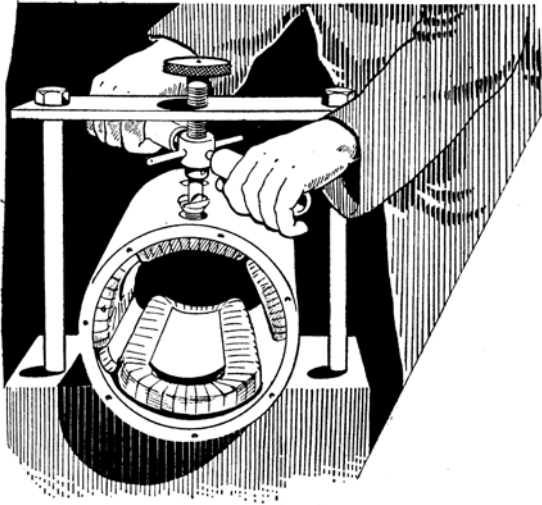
A Device for Unscrewing C.A.V. Pole-piece Screws.
